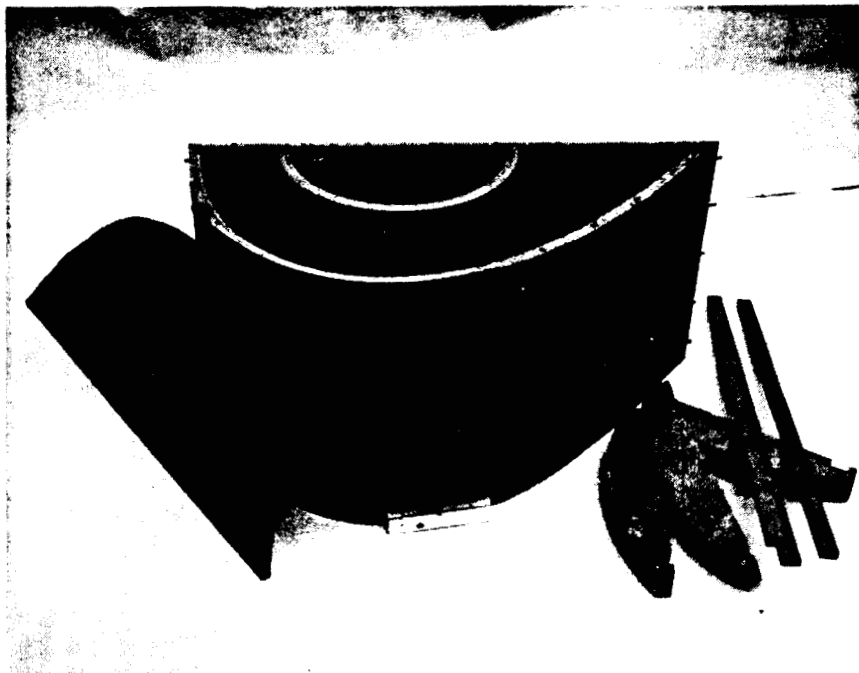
SHAPED GRAPHITE RETORT USED FOR COATING PROTOTYPE LEADING EDGE ASSEMBLIES
